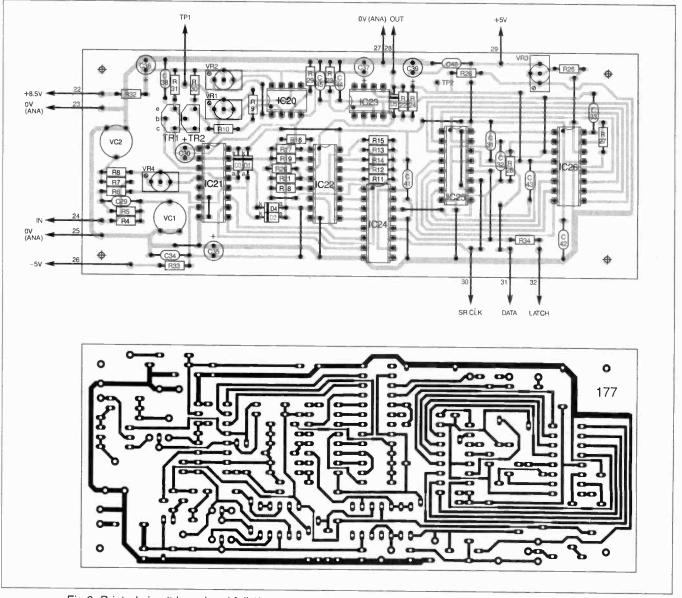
Printed circuit board and full size copper master pattern for one channel of the analogue section.
